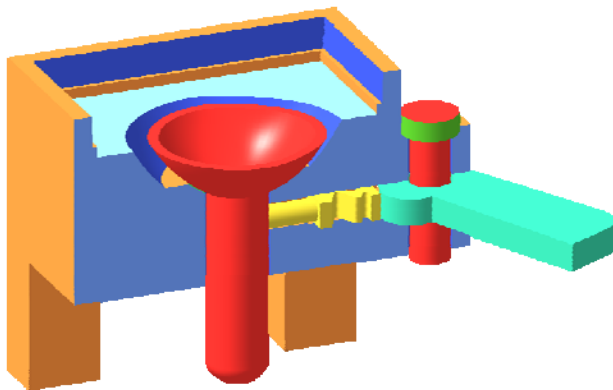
Cross-sectional view of the casting support device showing the position of the impression tray and the mechanism used to lock the tray in place (courtesy of Dr Hieu Le Chi, University of Greenwich).
